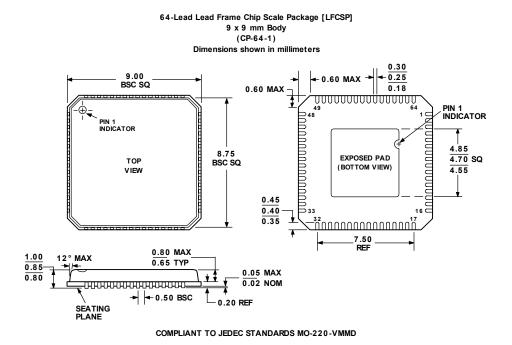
64-Lead Frame Chip Scale Package [LFCSP] (CP-64-1)—Dimensions shown in millimetres
